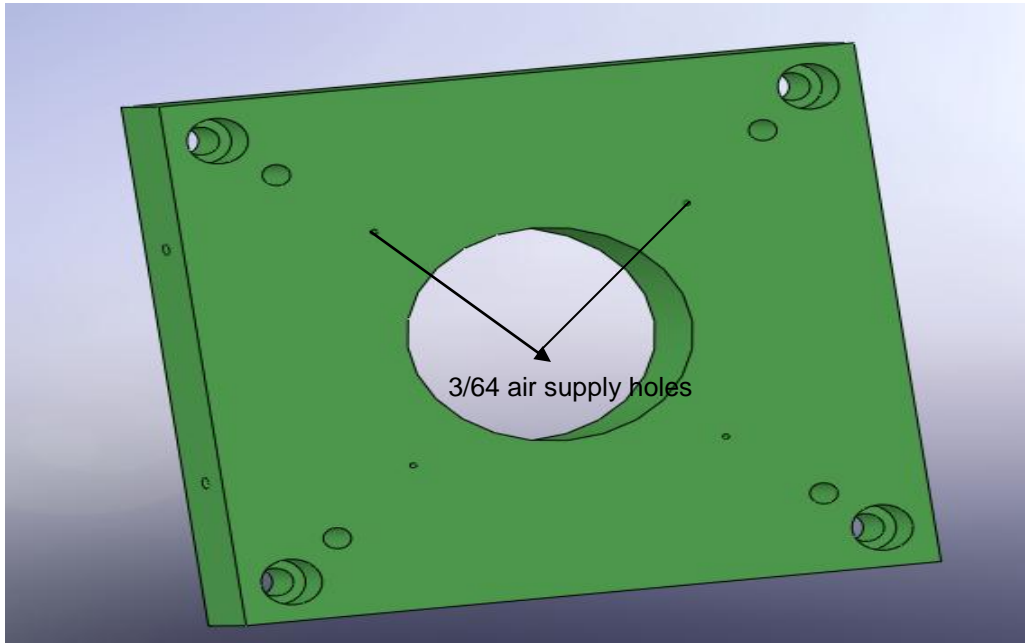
Outer housing of the thrust bearing showing air supply holes
